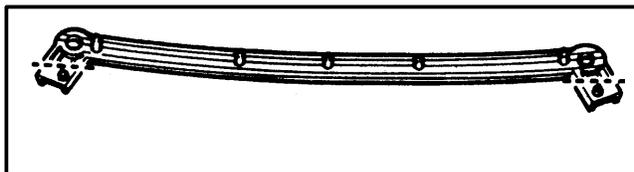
SEAL MODIFICATION FOR THE FRONT OF THE OIL SUMP, GM 6-250
